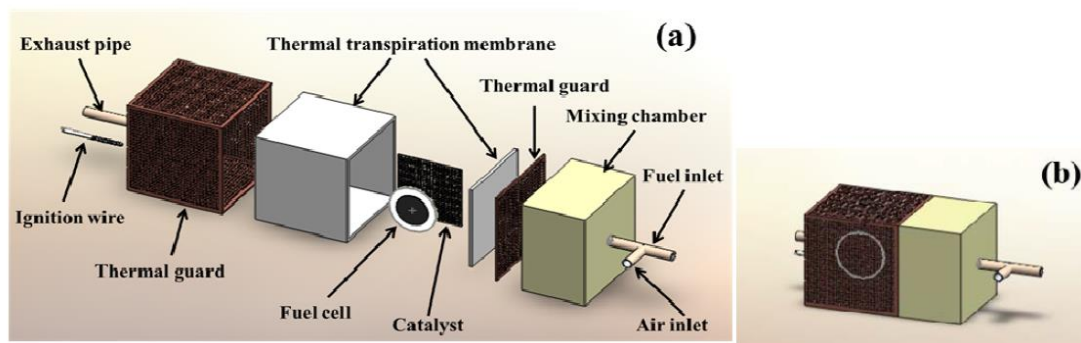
Schematic of a Knudsen pump for fuel cell feeding [61]: (a) exploded view and (b) assembled view.
